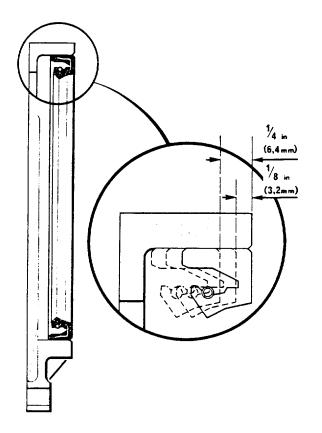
Three Positions for Lip Type Rear Main Oil Seal.
